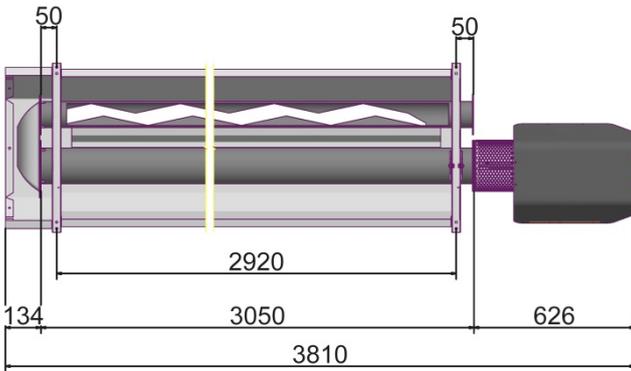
Dimension deltaSchwank 310U / 320U [view from below]
